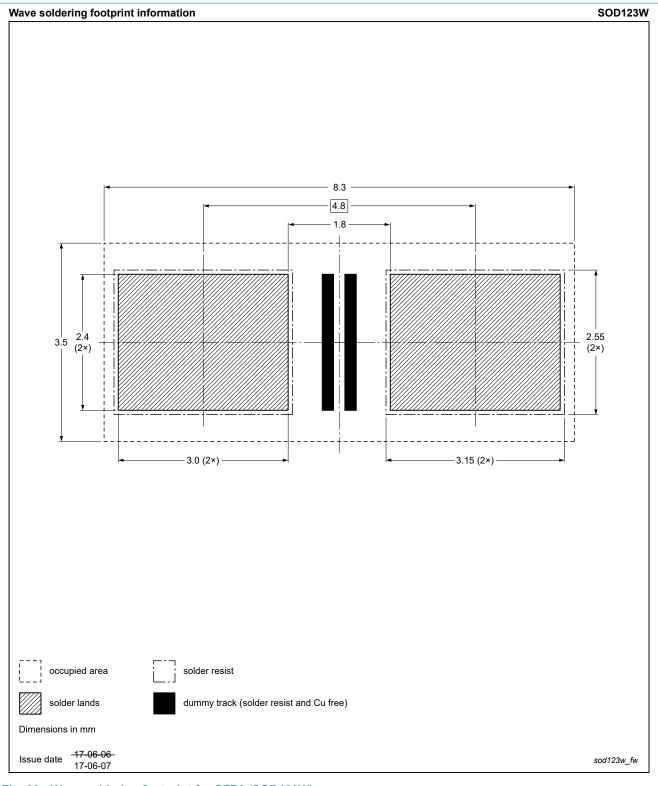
Wave soldering footprint for CFP3 (SOD123W)
